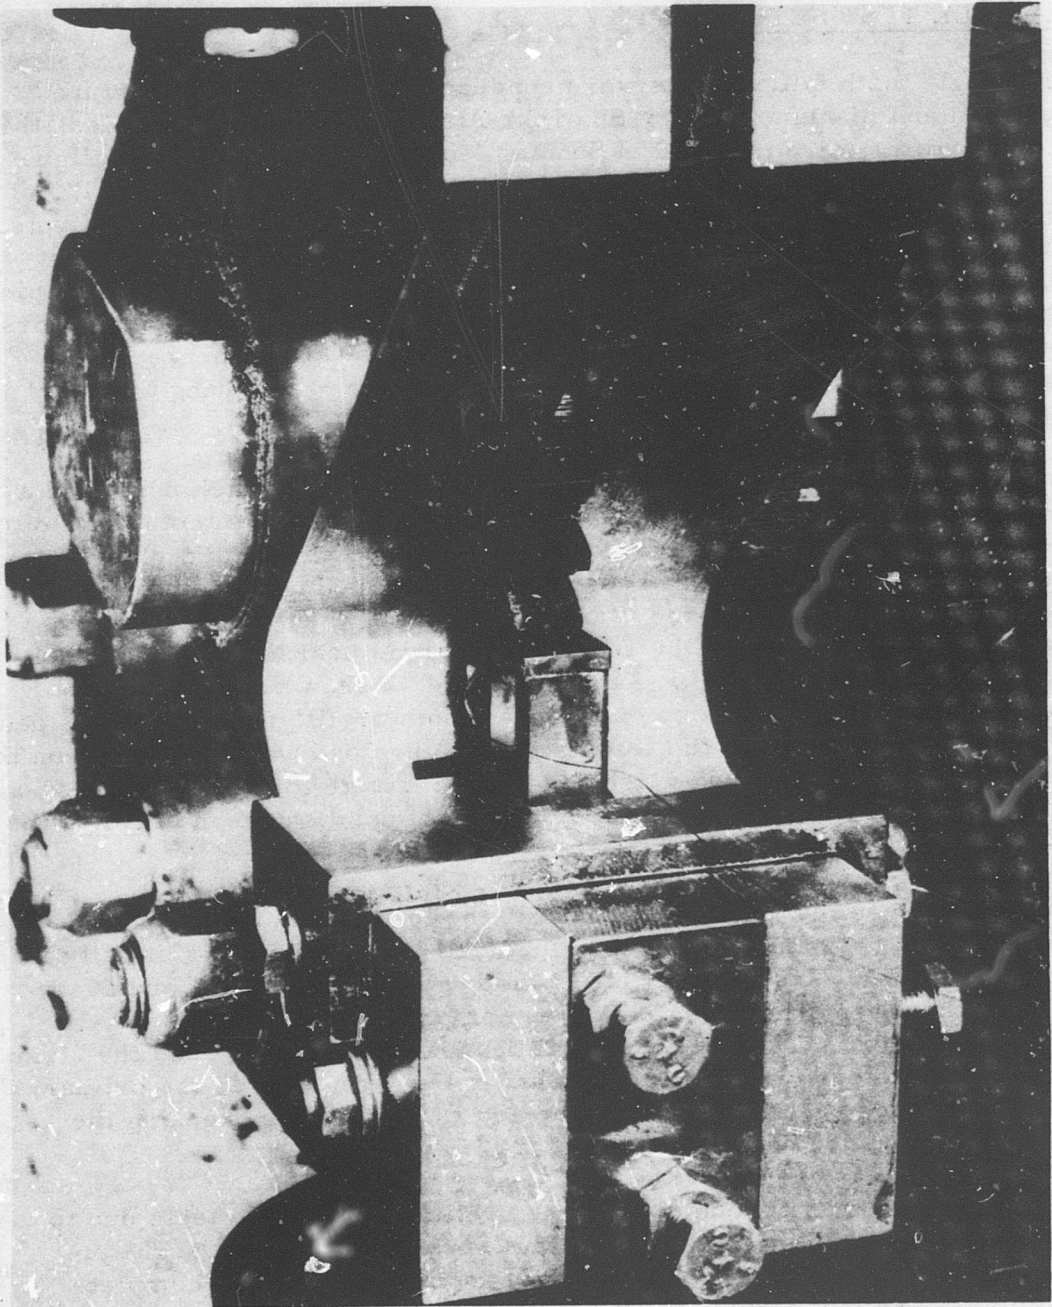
Sikorsky Aircraft Single Tooth Test Fixture.
